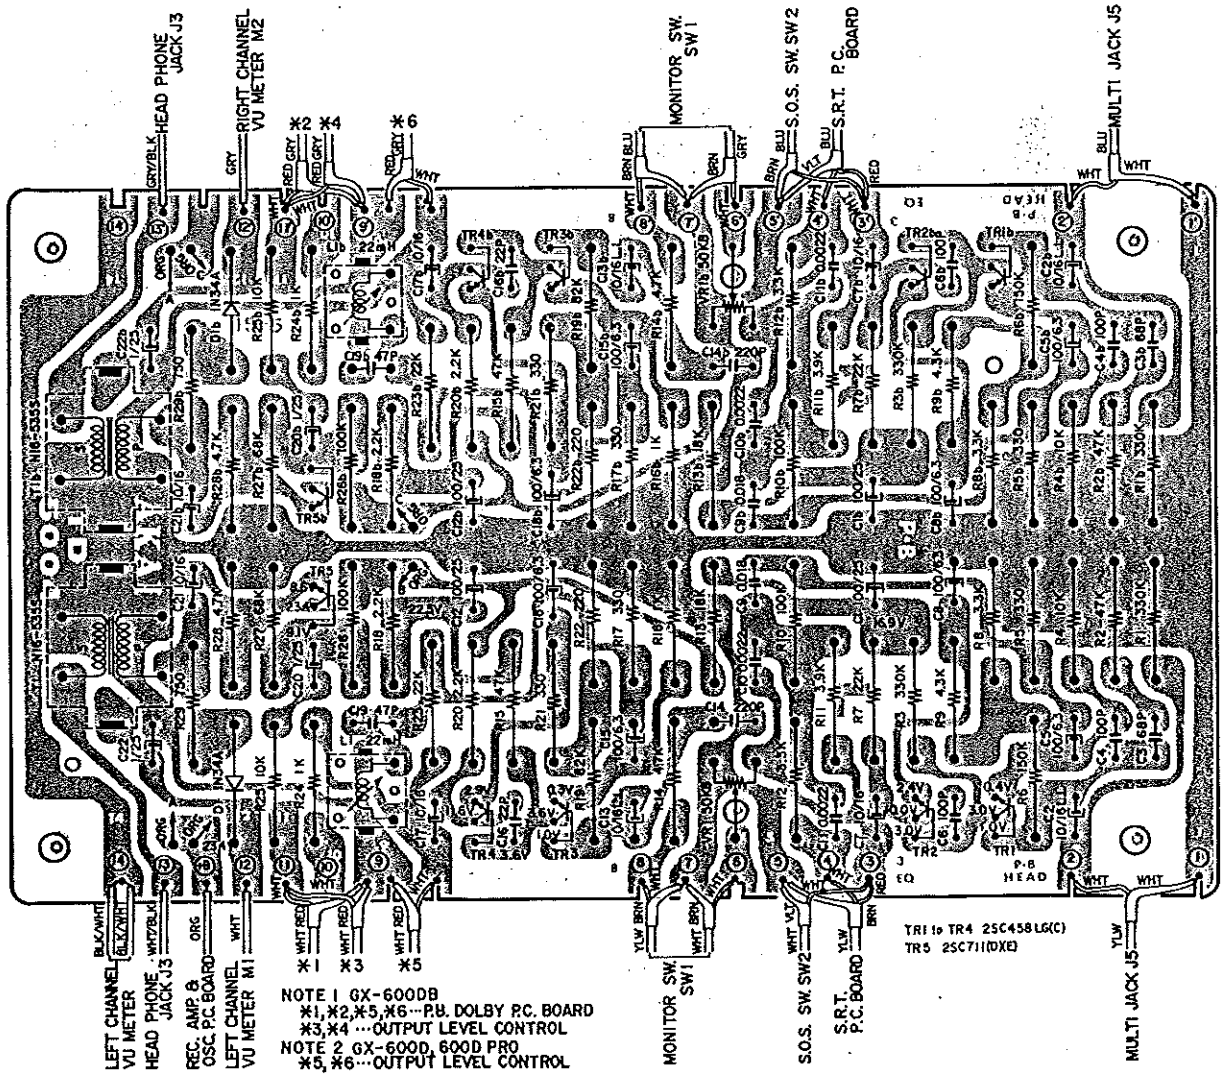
PB. AMP. P.C. BOARD TD-5004 (Reverse Side)
